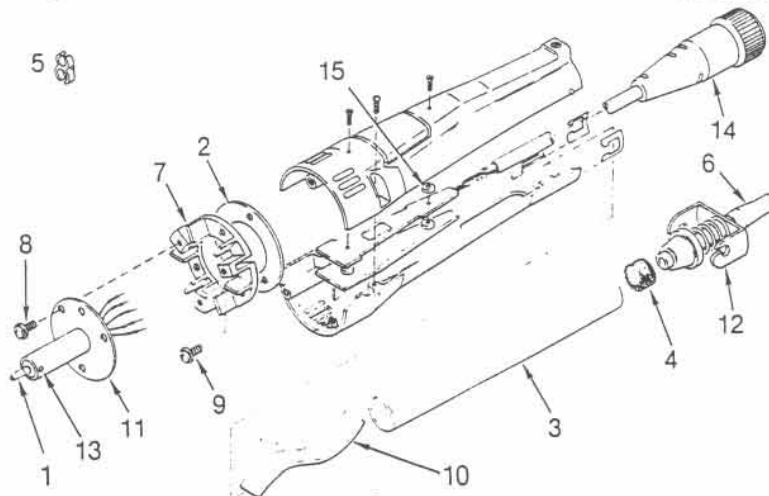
REPLACEMENT PARTS FOR SX-65 EXTRACTOR ASSEMBLY
